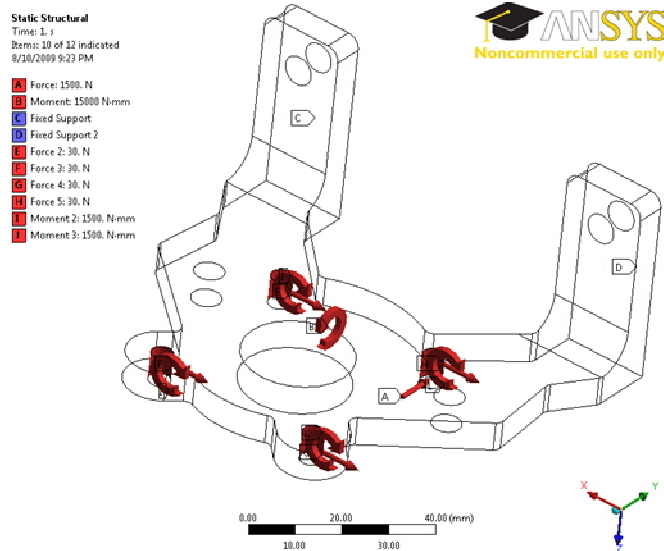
Applied loads and fixed supports to motor mounting plate.
